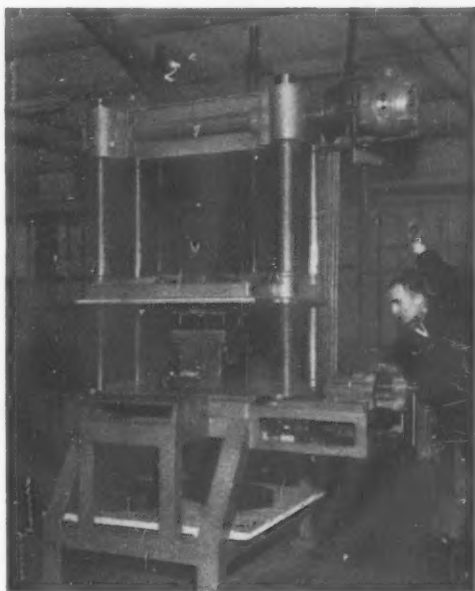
Final Fitting Work on Die Casting Dies is Carried Out with the Aid of this Fonderpress-built Die Try-out Machine, on which the Moving Platen can be Actuated Either Manually or Mechanically
